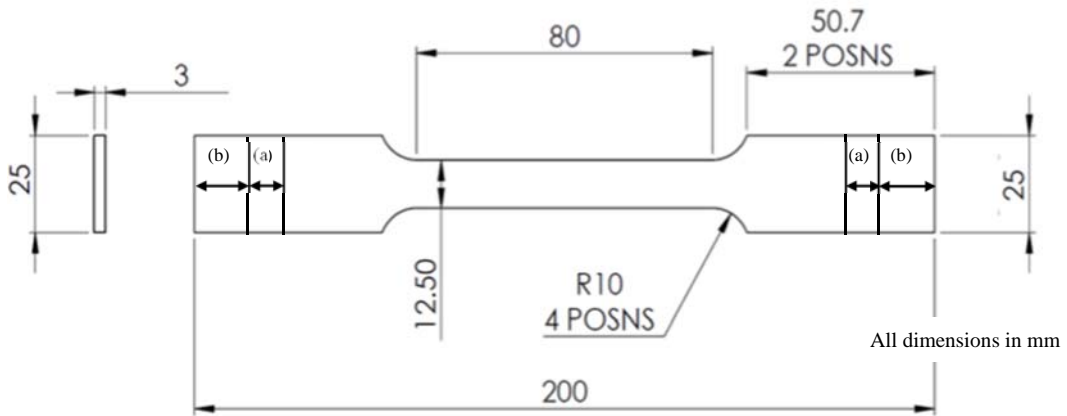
Specimen dimensions and configuration (a) Spacing = 10 mm; (b) Grip length = 20 mm
